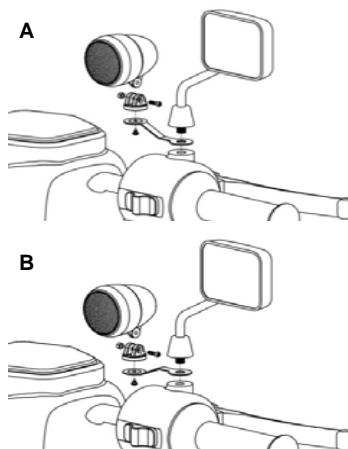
Overall demonstration of loudspeaker assembly process on a mirror mount.
